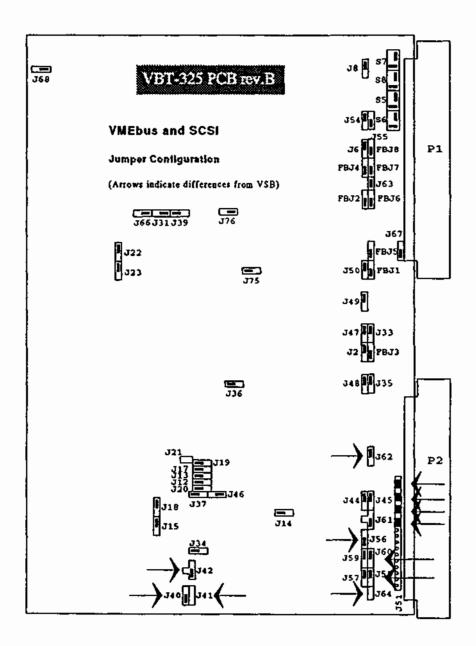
B. Jumper settings for VME and SCSI, VBT-325 PCB rev B.
